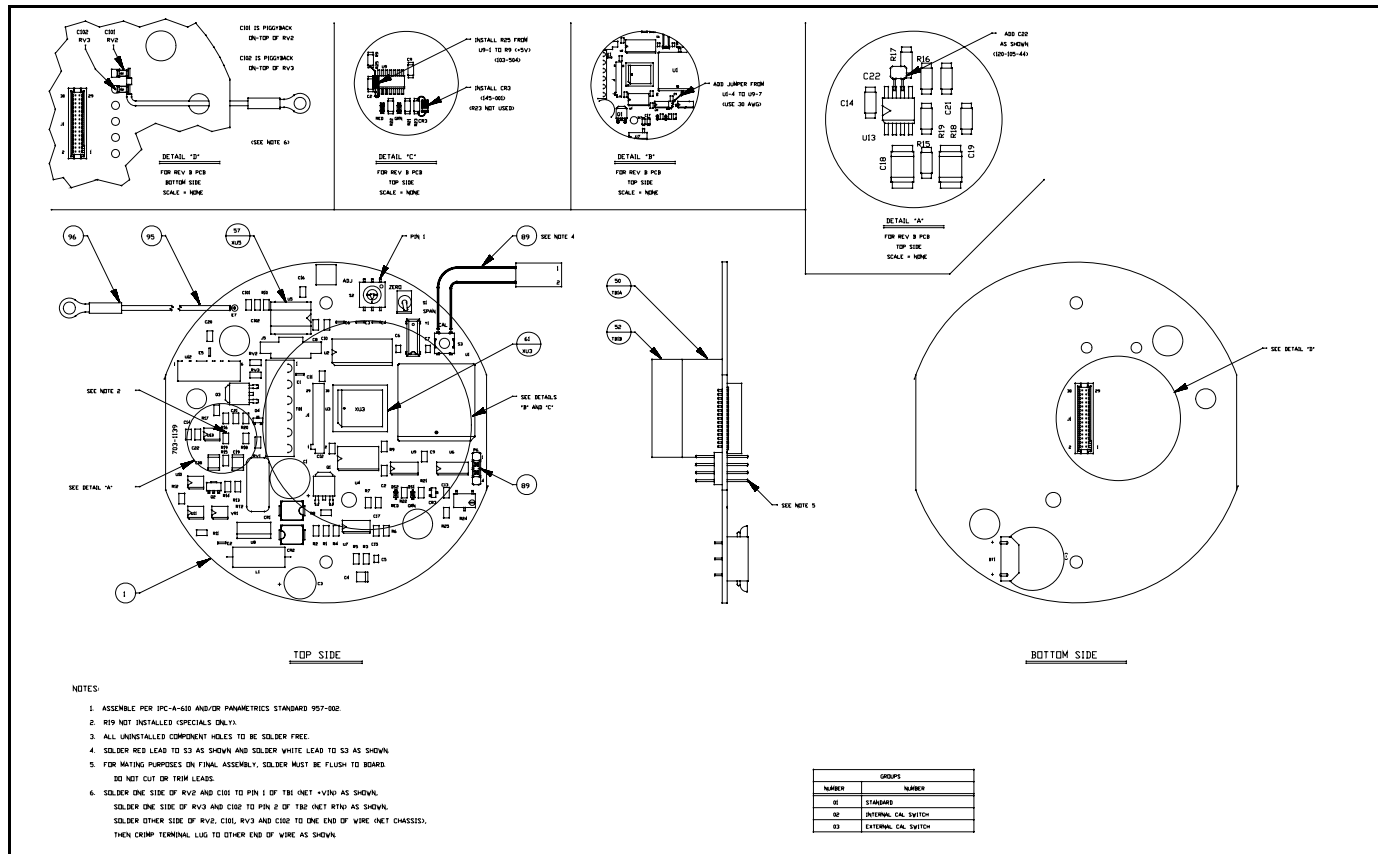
Digital PCB Assembly (ref. dwg #703-1139)
